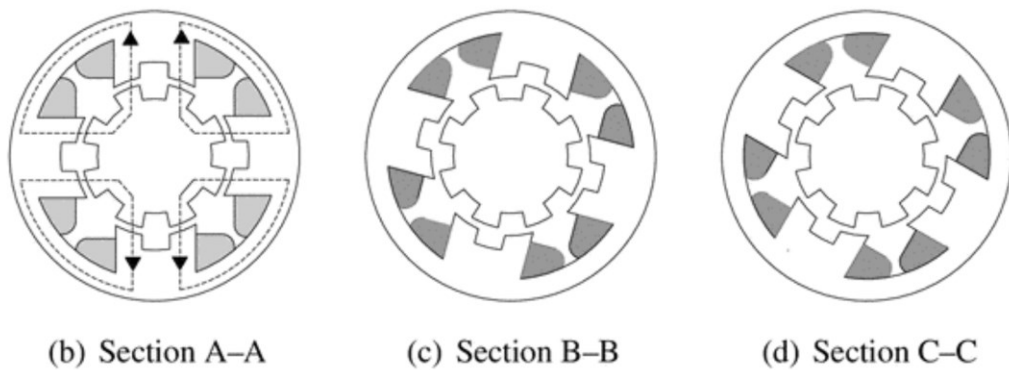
Section views of a multi-stack variable reluctance stepper motor. Section A-A shows also the magnetic flux propagation through the motor. [19]
